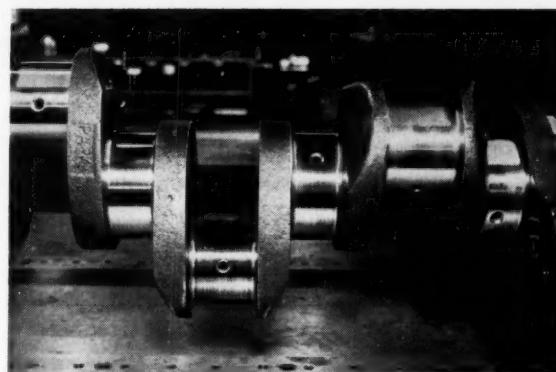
Crankshaft after inspection with a blueing gage
